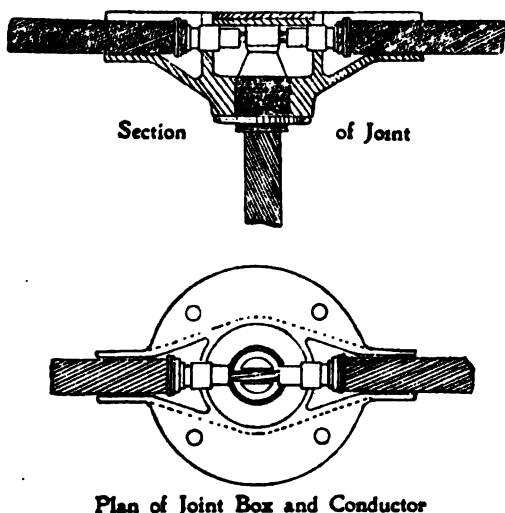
Showing Method of connecting a Branch to Messrs. Mavor & Coulson's Concentric Cables.
